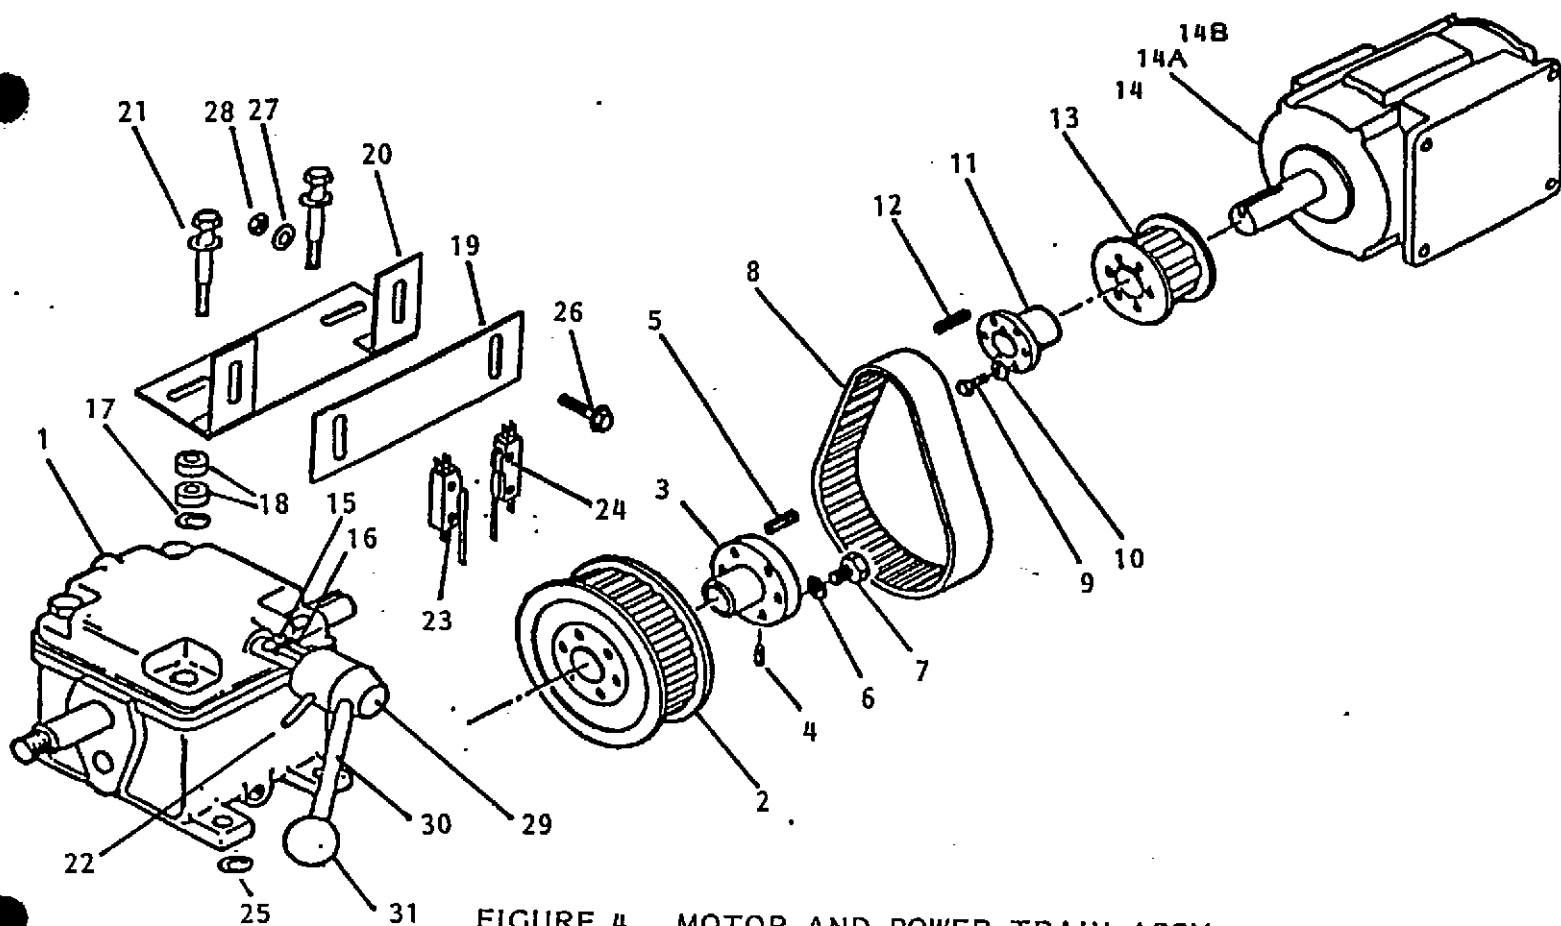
MOTOR AND POWER TRAIN ASSY
